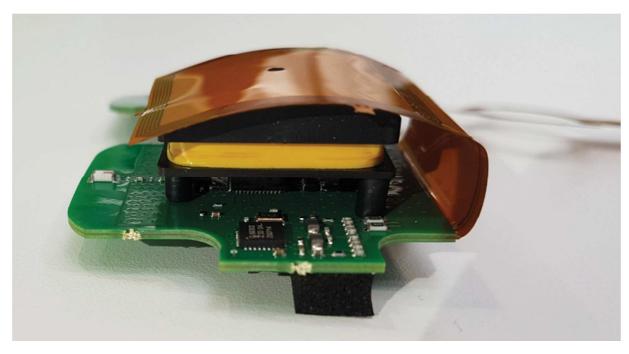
Side view of Radio Module and flexible PCB with radio coil
